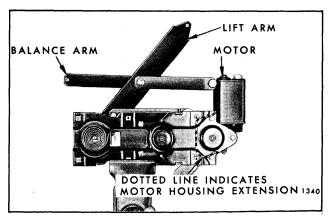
Door Window Regulator and Electric Motor Assembly
